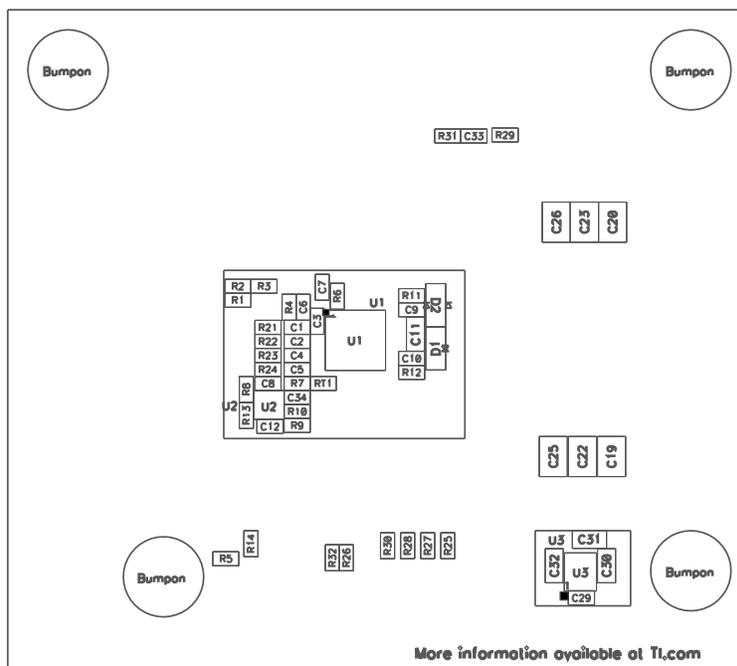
TPS51727EVM Bottom Assembly Drawing, Bottom View
